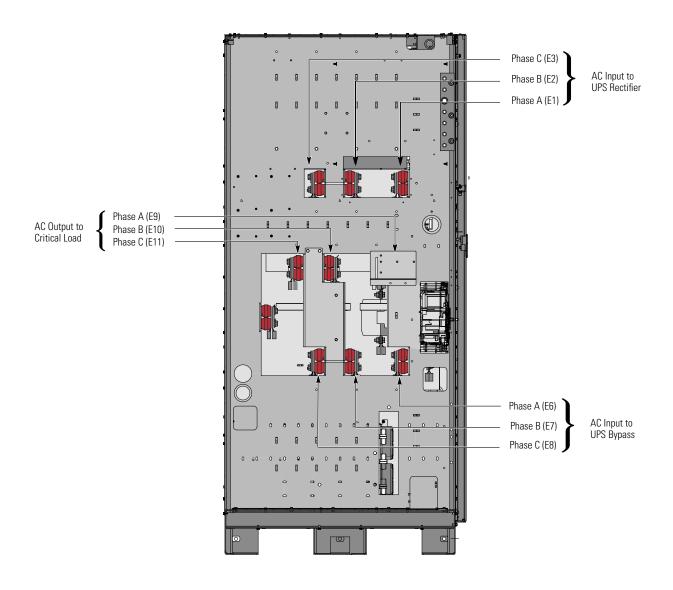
ISBM Section Power Terminal Detail - Section AA (380V, 400V, 415V, and 480V Models)
